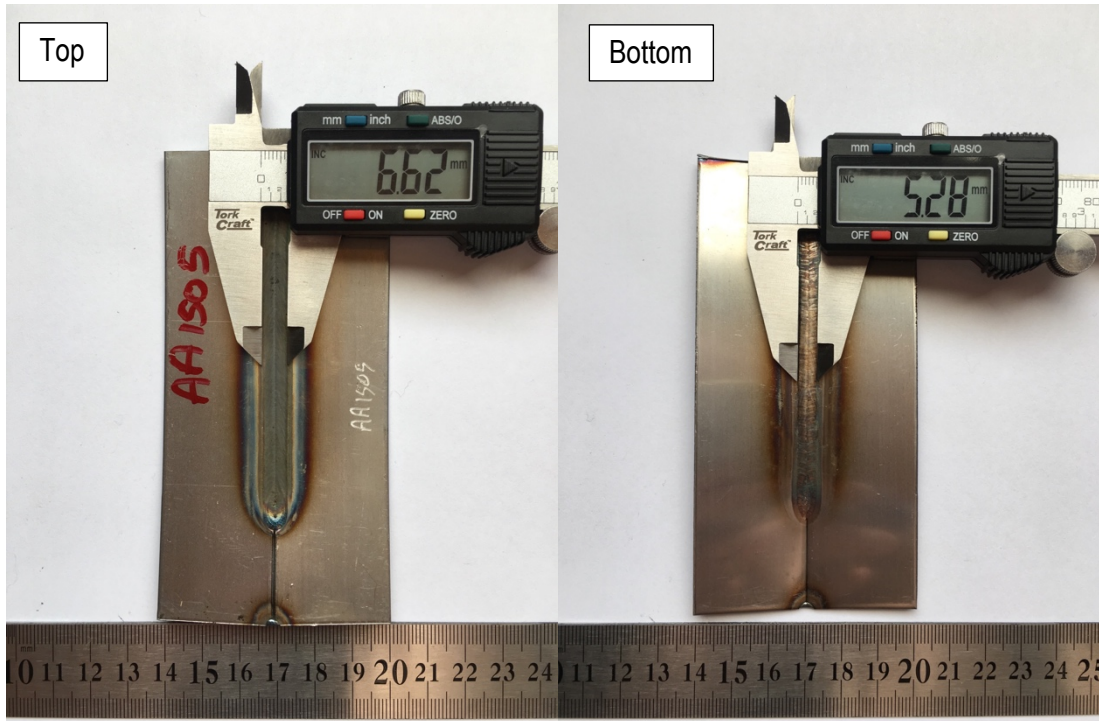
Illustration of the measurements of the top and bottom widths of the weld bead using a digital Vernier for both Grades 441 and 436. The figure illustrates a Grade 436 weld completed with 150A, 5 mm/s, pulsed at 15Hz and an electrode tip angle of 30° (Weld ID: AA1505)
